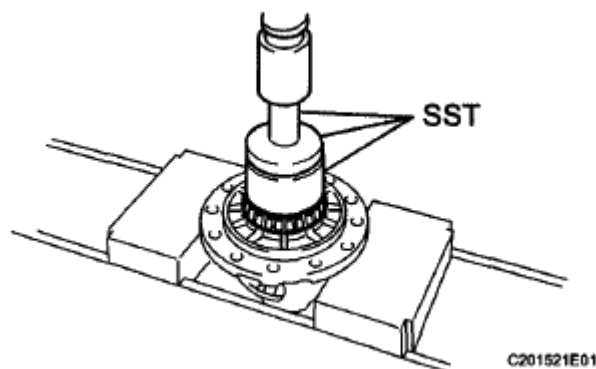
Installing Front Differential Case Rear Tapered Roller Bearing And Differential Case
